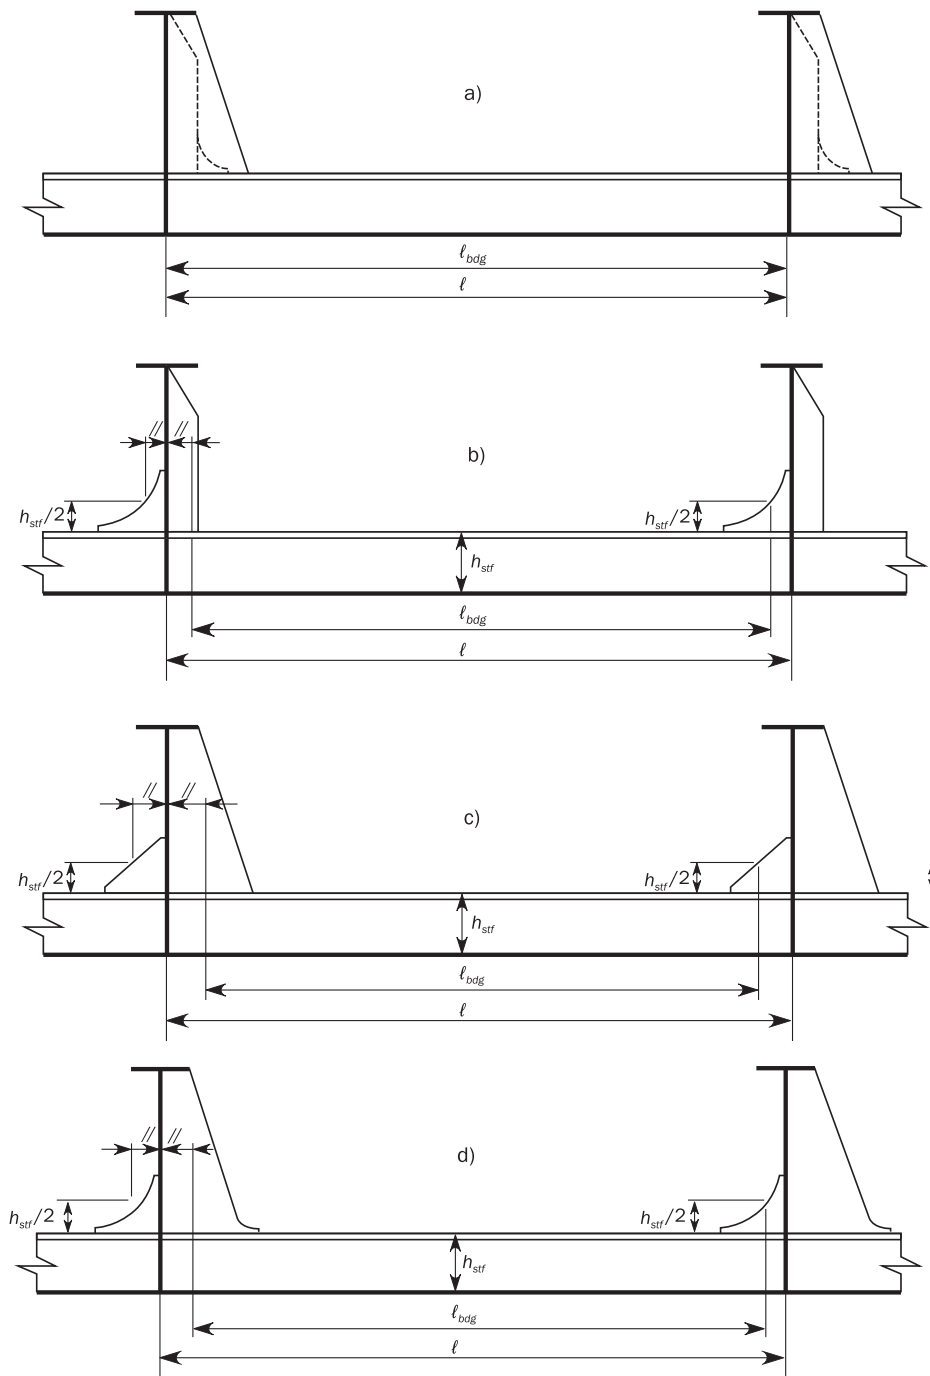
Effective bending span of stiffeners supported by web stiffeners (single skin construction)
